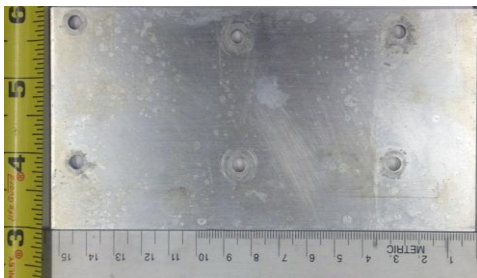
Corrosion panel sample on the uncoated side with 6 through rivet holes, AA 7075-T6.
